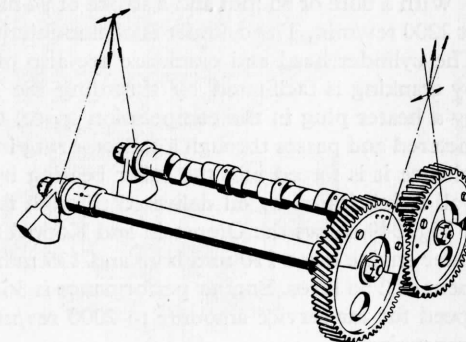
Arrangement for balancing primary couples in a two-stroke engine.
